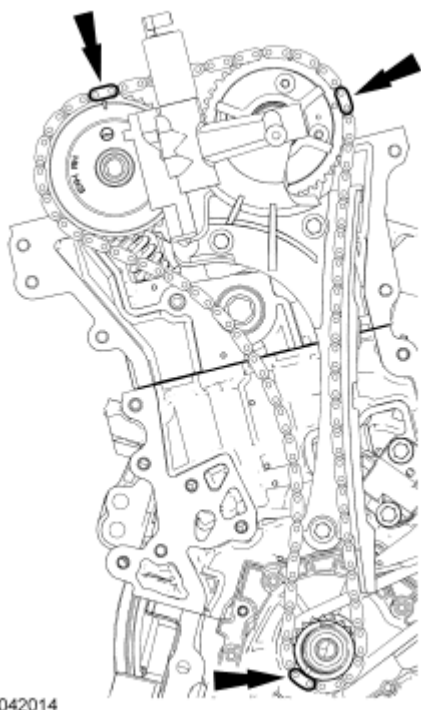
Aligning Marks On Timing Chain With Marks On Camshaft And Crankshaft Sprockets
